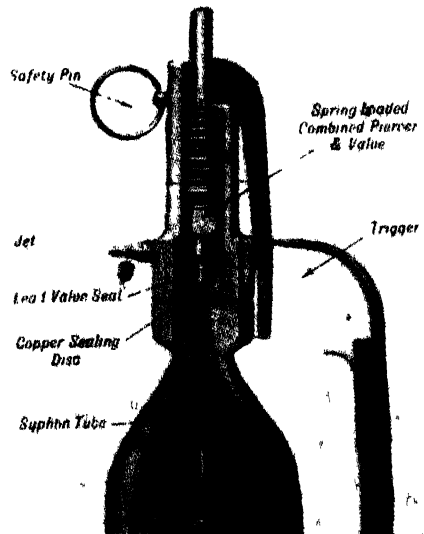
“ESSEX” EXTINGUISHER HEAD
